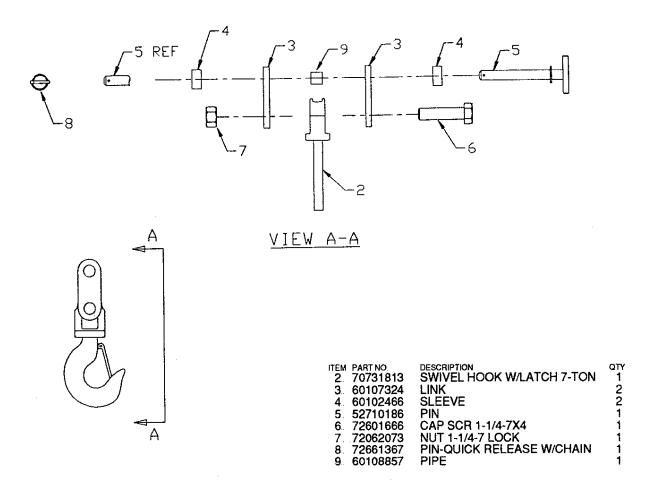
SWIVEL HOOK ASSEMBLY 7-TON (51710187)
